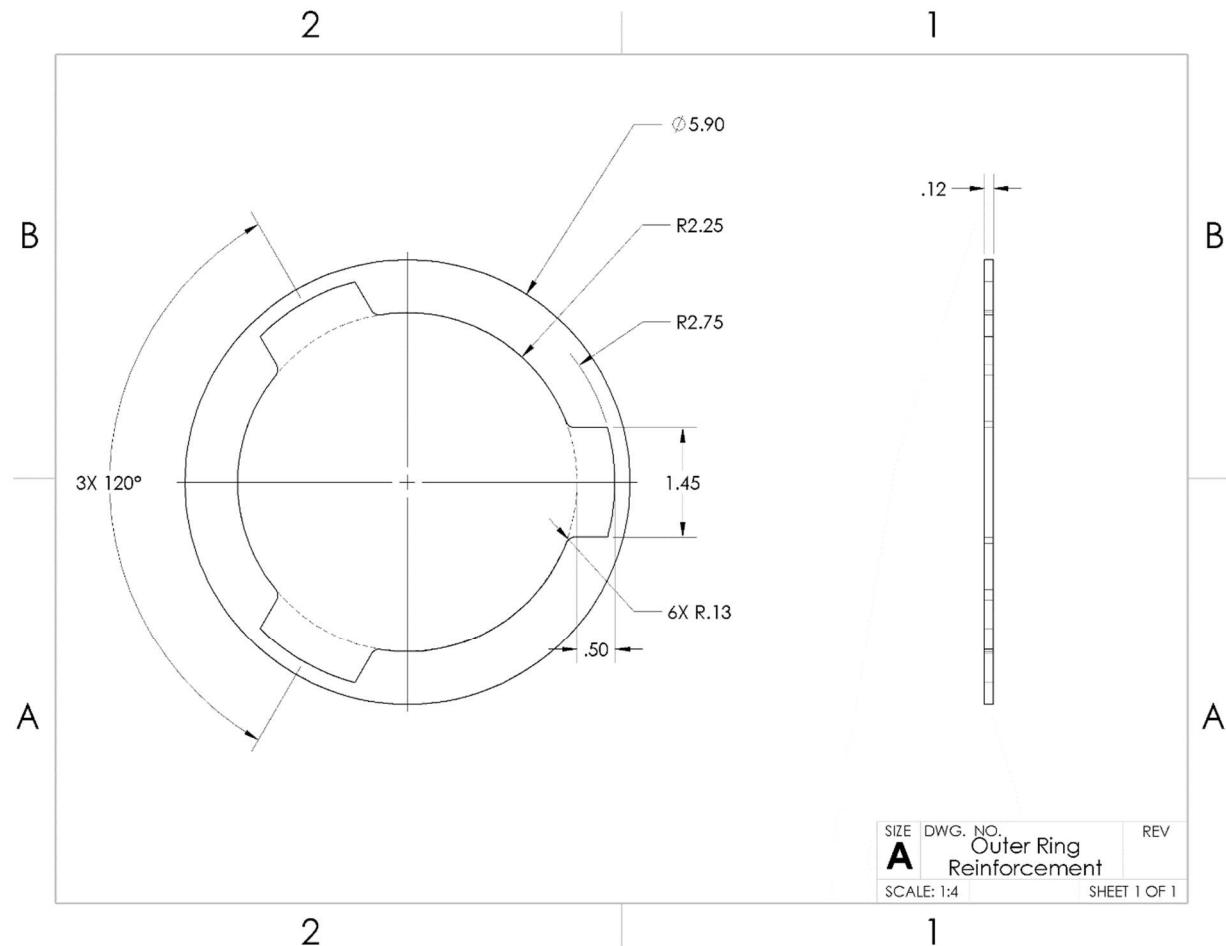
Locking Mechanism Outer Ring Reinforcement Drawing
